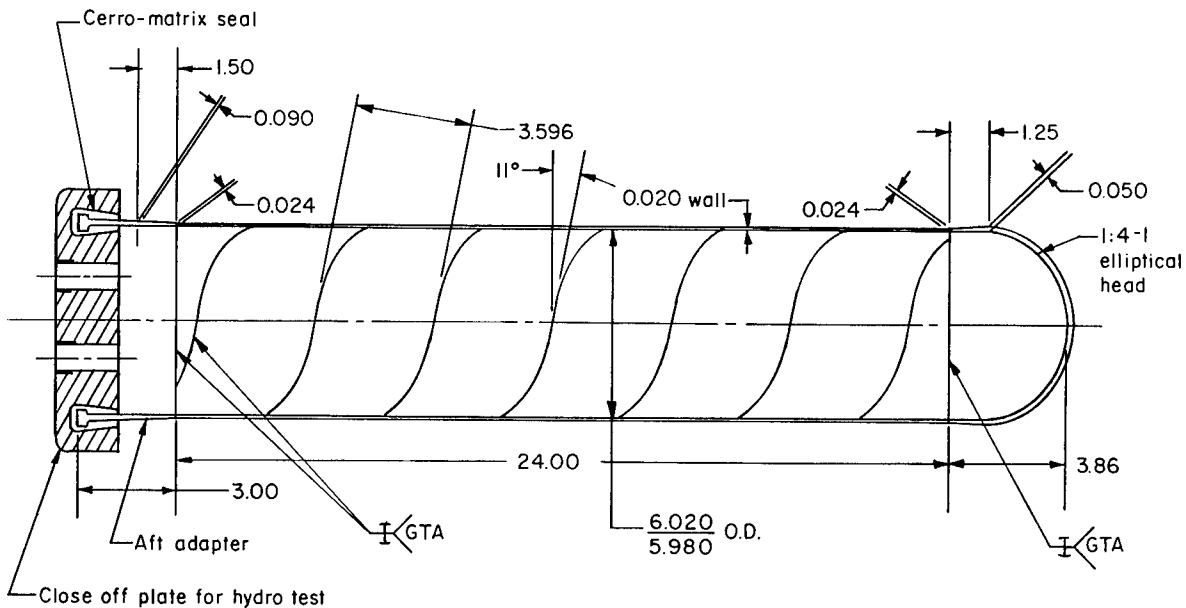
Helically welded rocket-motor case (ref. 13).
